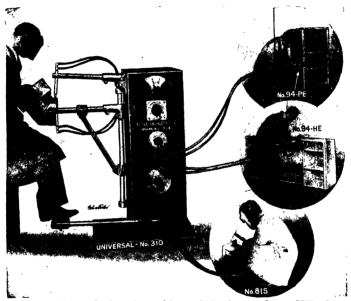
A universal electric welder: 815. Arc welder, HE. Gun welder,
